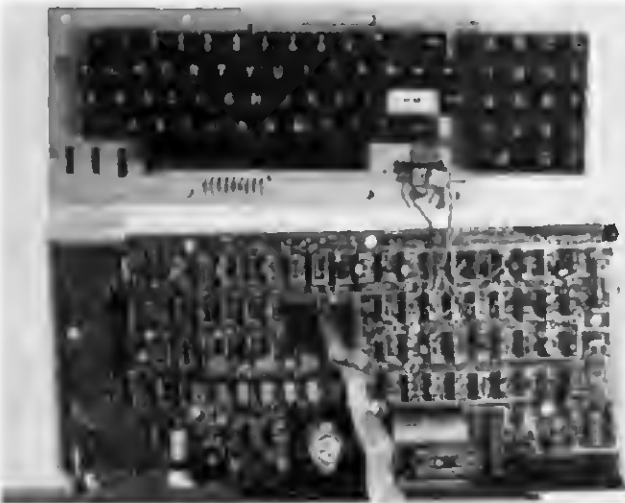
Keyboard and CPU board after removal of ROMs and mounting of hex keypad. Note cable to Level II ROMs at bottom center of photo. ROMs are remounted in the feet of the case bottom.
